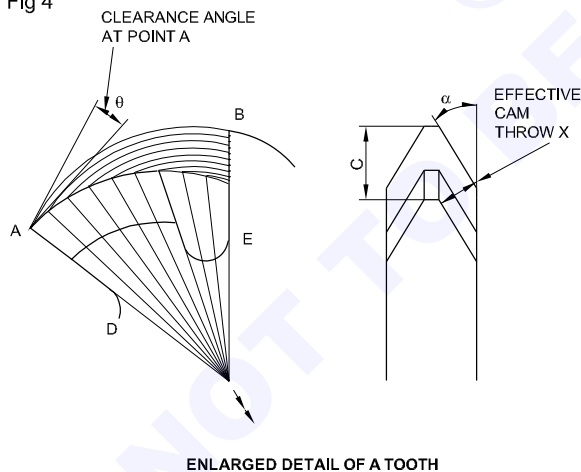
shows a form relieved milling cutter and Fig 4 exhibits the relieved portion in a cutter tooth.
